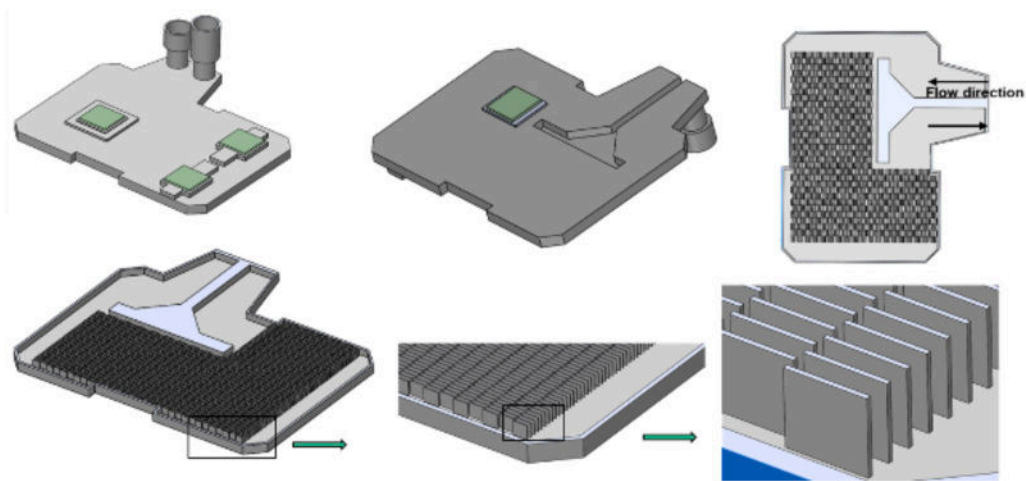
The CAD Model Representing the Double-sided Cold Plate
